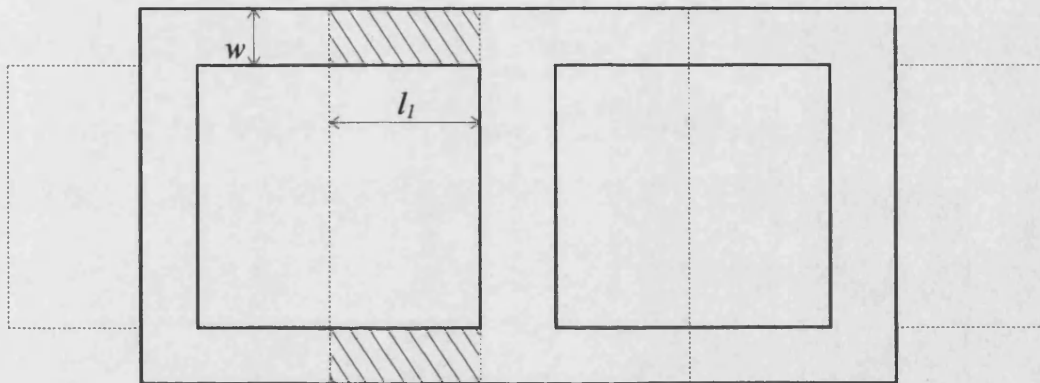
Three-phase transformer core developed from three single-phase cores, showing added section to accommodate for the centre-limb winding
